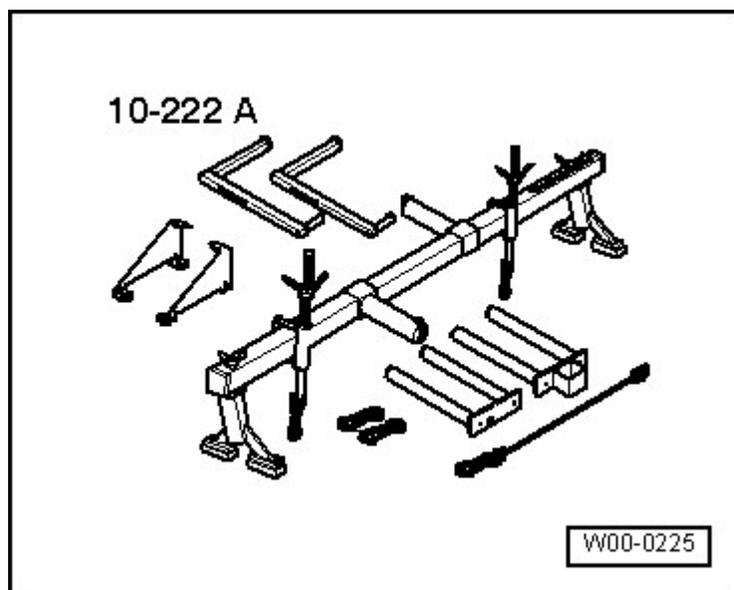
Identifying Special Tools -- Engine, Securing To Engine And Transmission Holder
